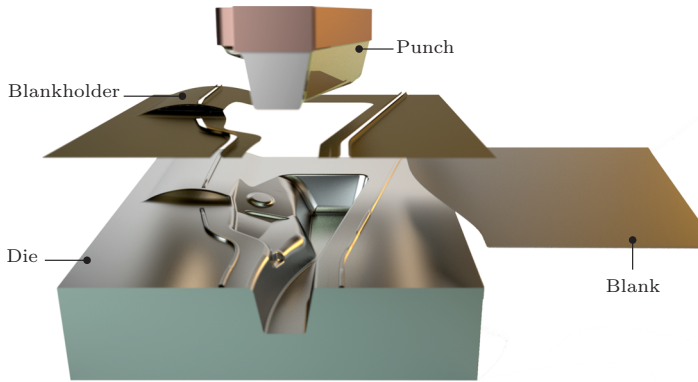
Exploded view of the set-up for deep drawing of an automotive part.
